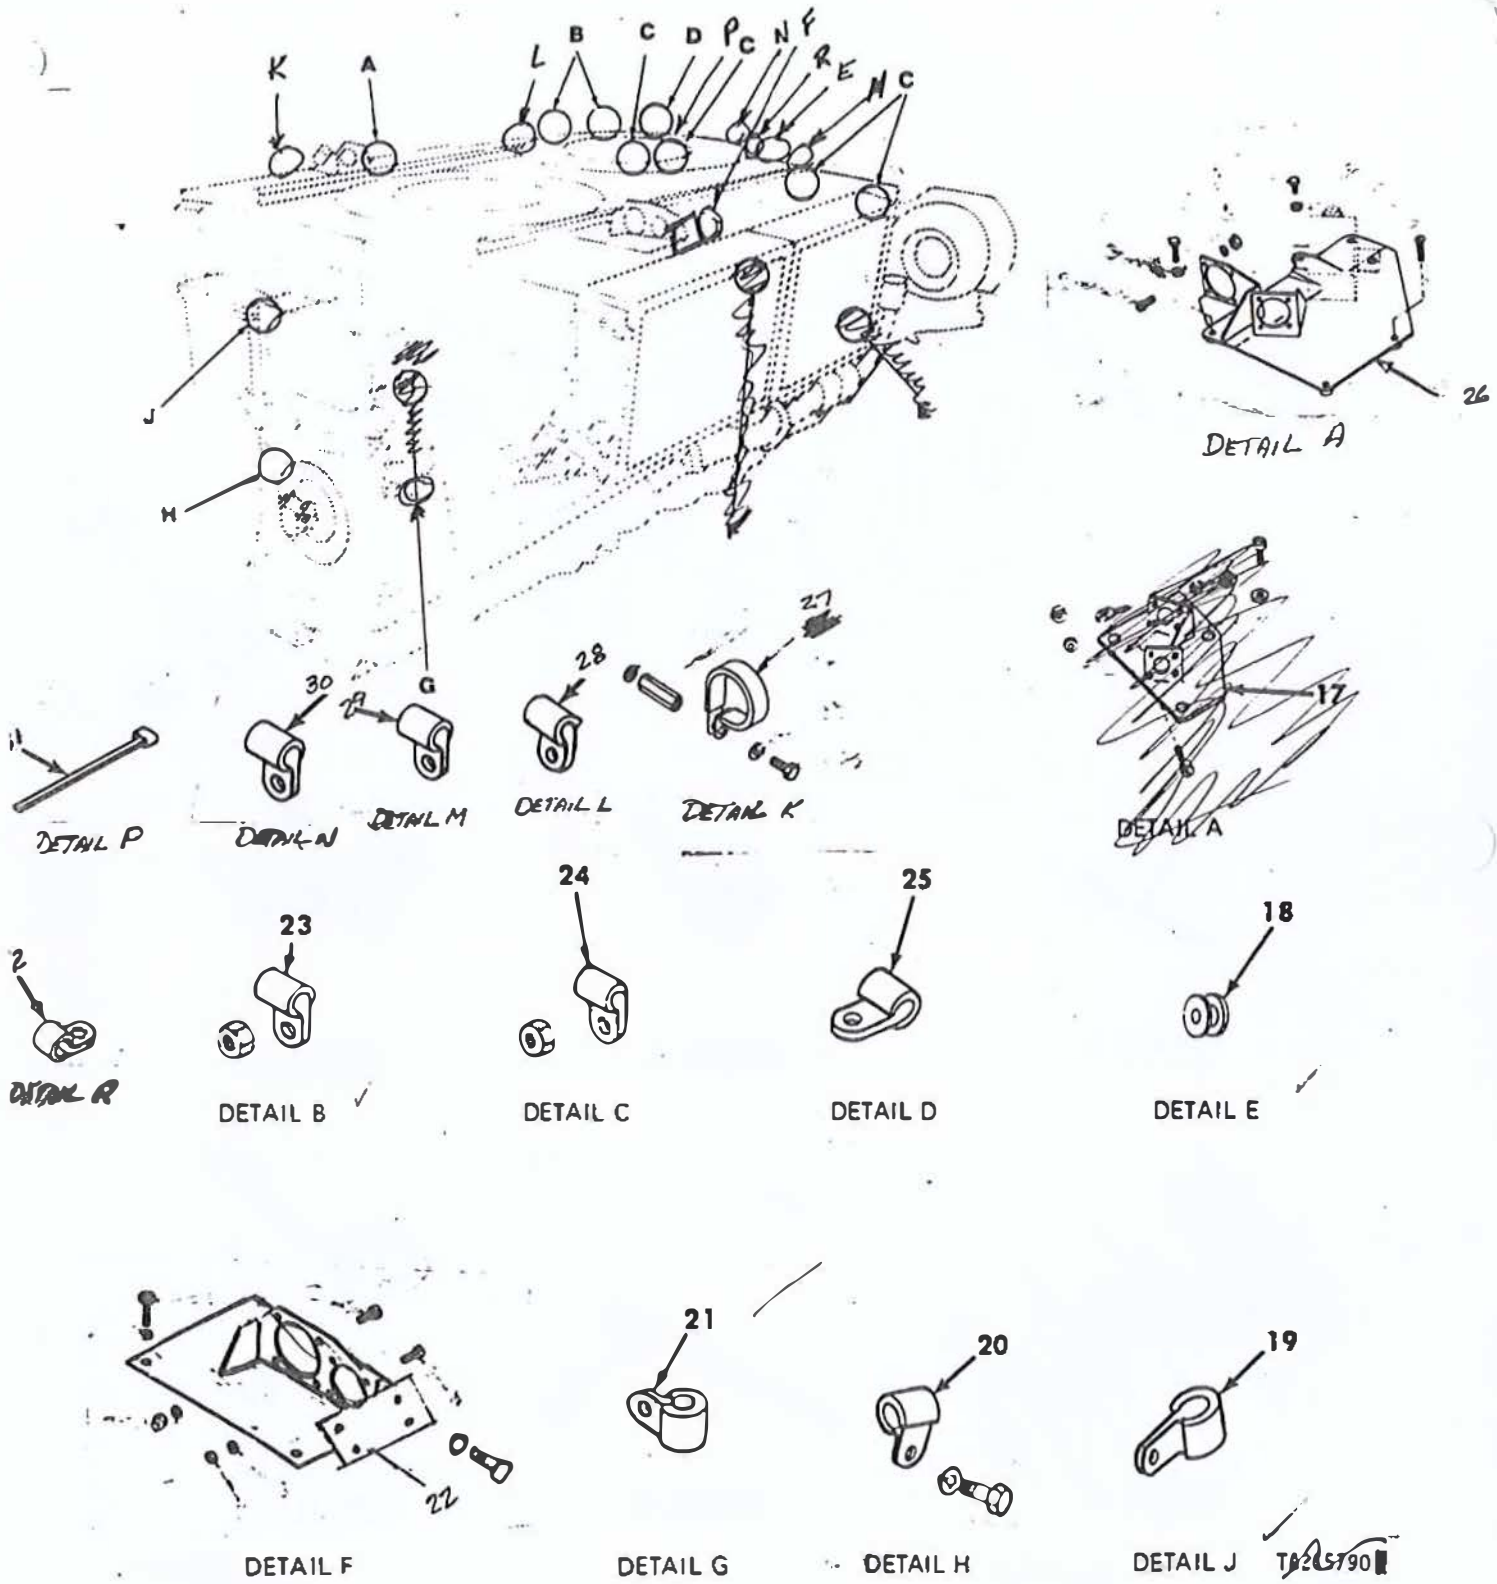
Engine wiring harness brackets and clamps (Sheet 3 of 3).
